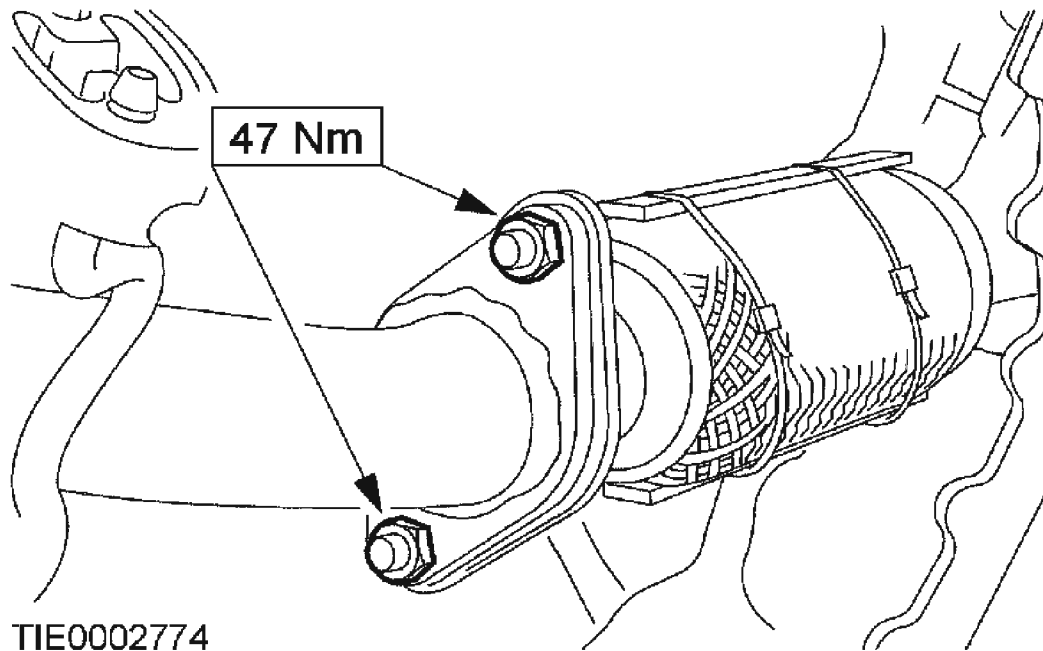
Installing Exhaust Flexible Pipe To Tailpipe And Muffler Assembly
